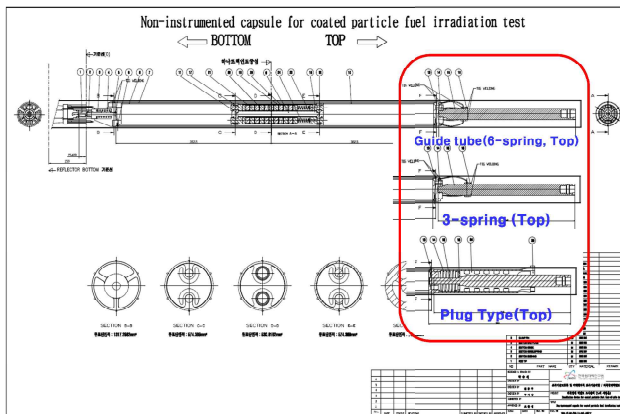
Assembly drawing of mockup device for coated particle fuel irradiation testing [3].
